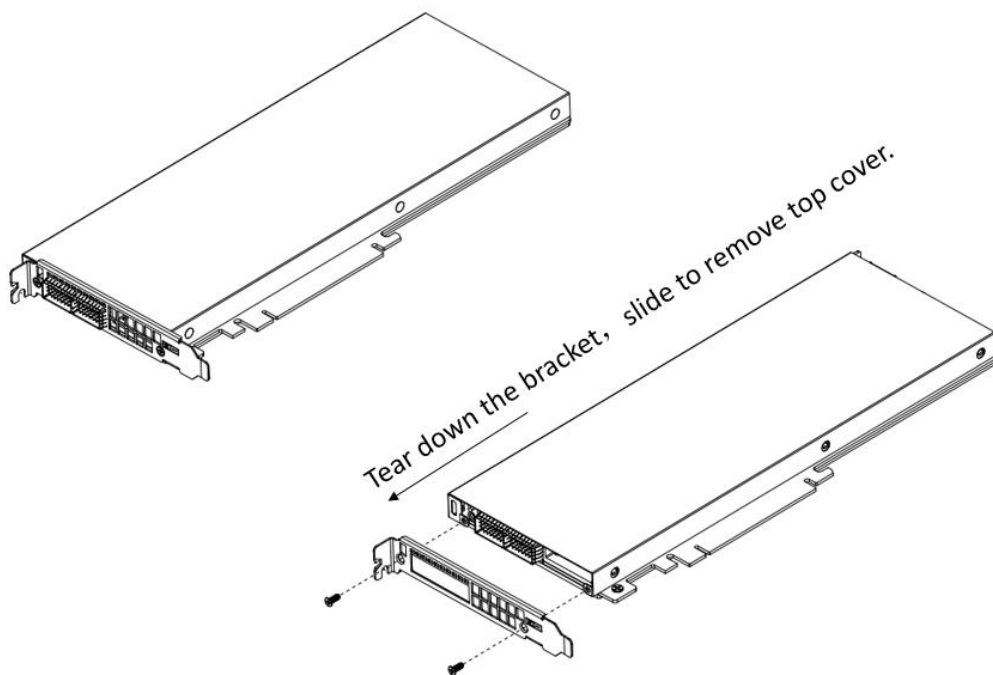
Toolless design apply to MLU370-X4 top cover
